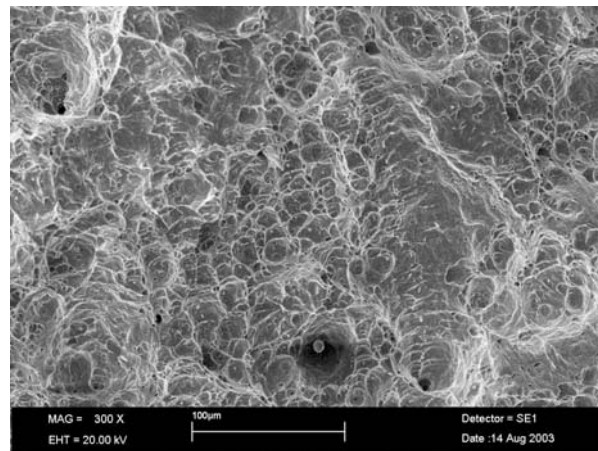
SEM fractograph of the sample welded at 2100 rpm.
